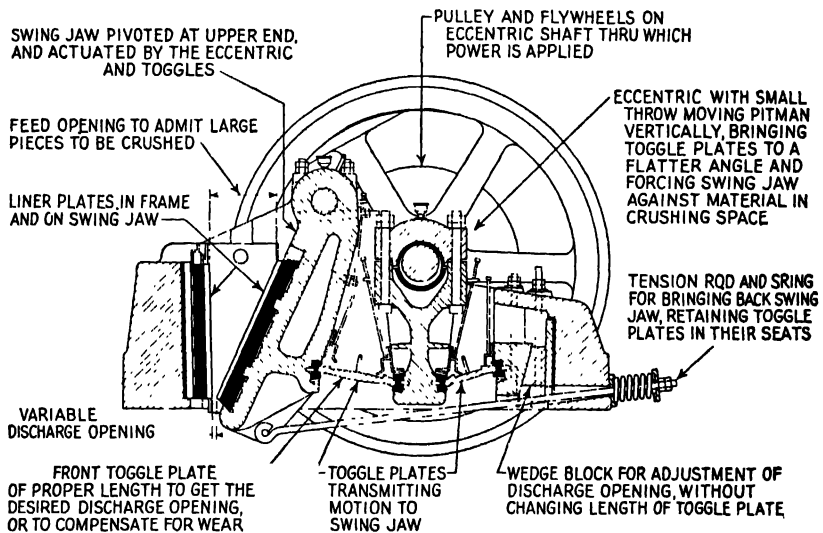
Jaw Crusher. Courtesy Allis-Chalmers Manufacturing Company, Milwaukee, Wis.
